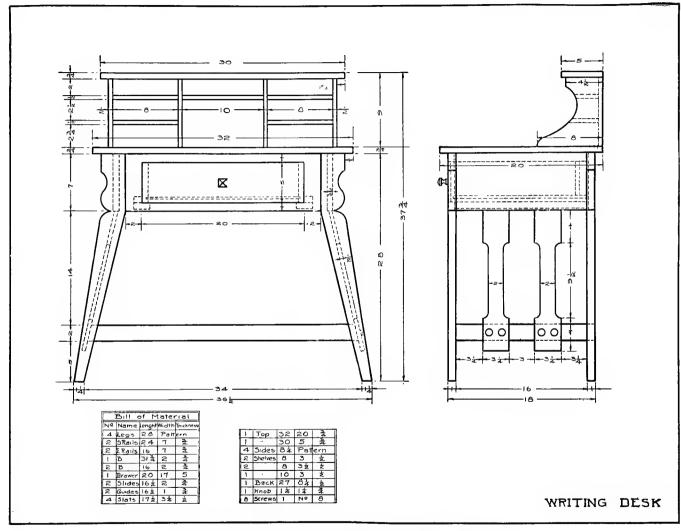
Working Drawing of Writing Desk (Eighth Grade)
